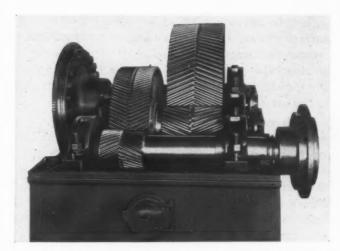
This mill unit shows several examples of gears cut after heat treatment, including high speed and mill pinions and a low speed gear
